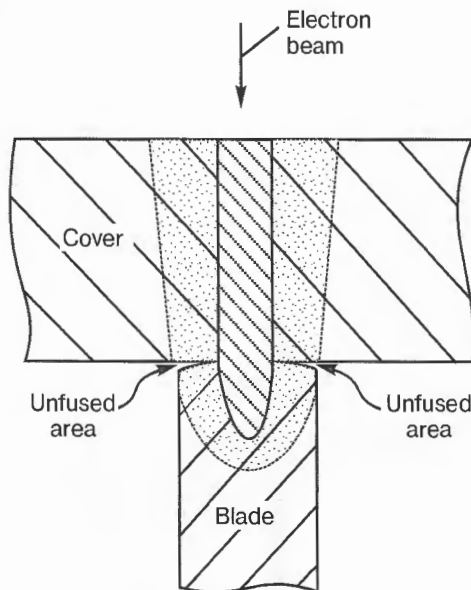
A conventional electron beam weld between a cover and blade showing the fused and unfused areas
